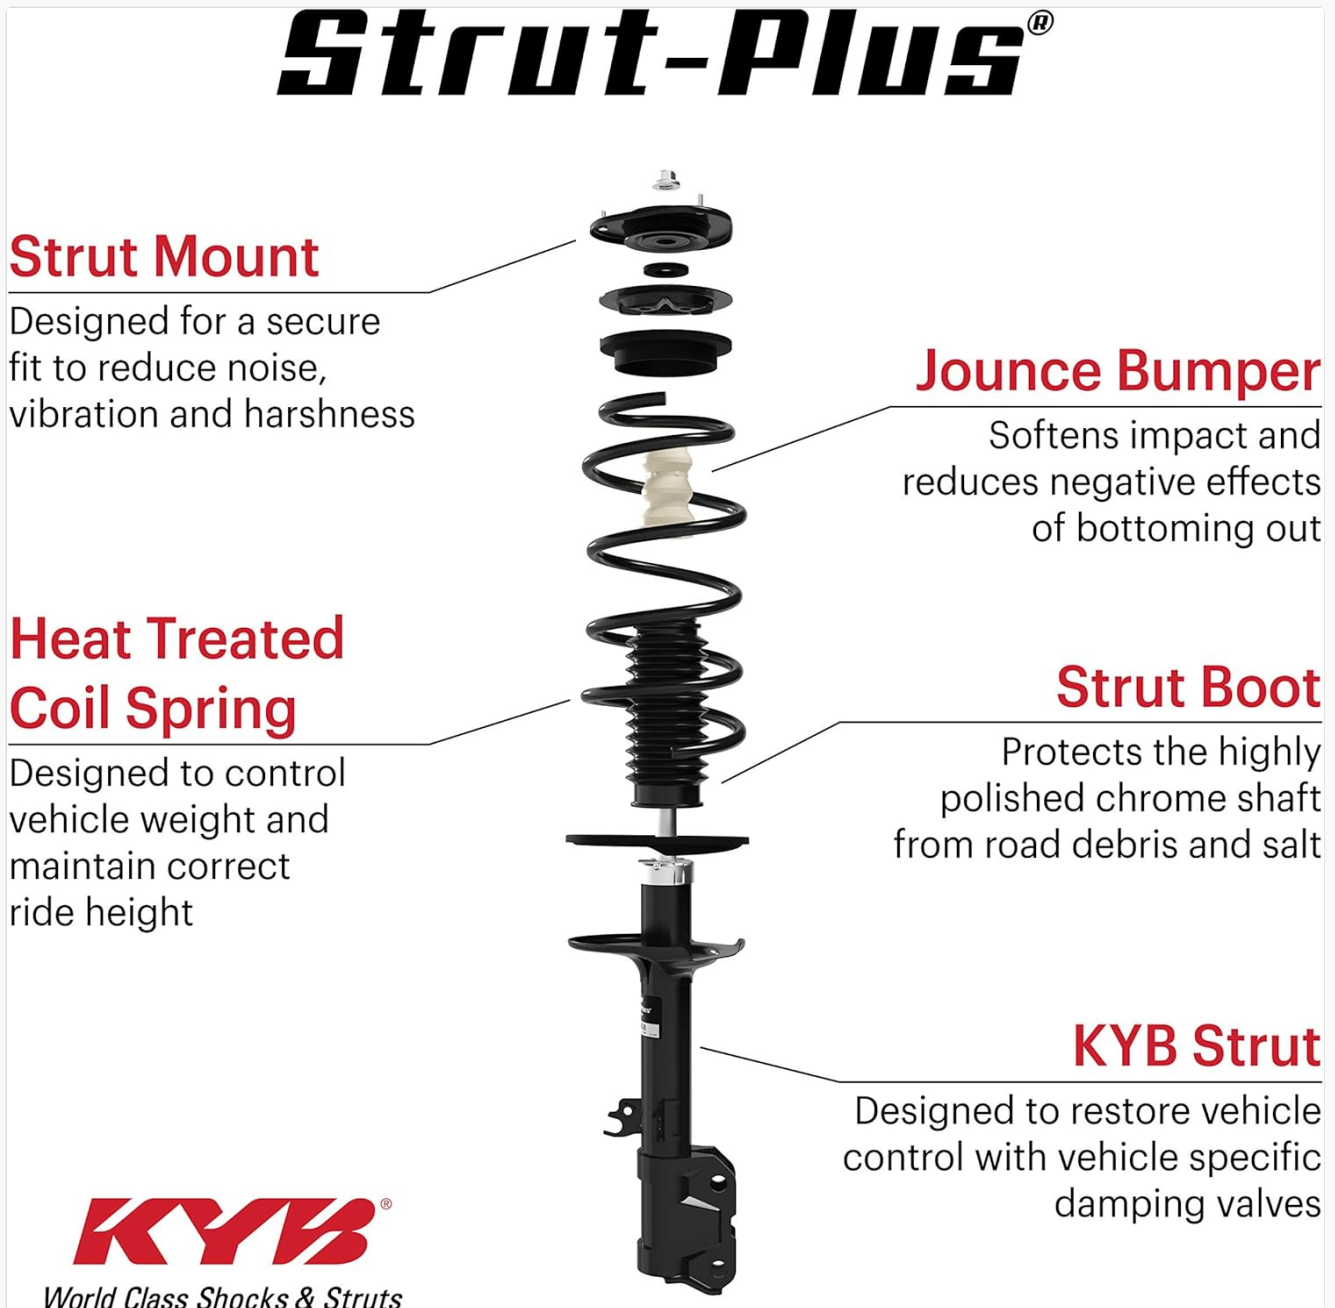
Exploded view illustrating the individual components of the Strut-Plus assembly.
